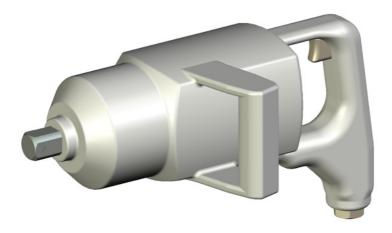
Impact wrench/impulse nutrunner with bow grip and bow-shaped support handle
